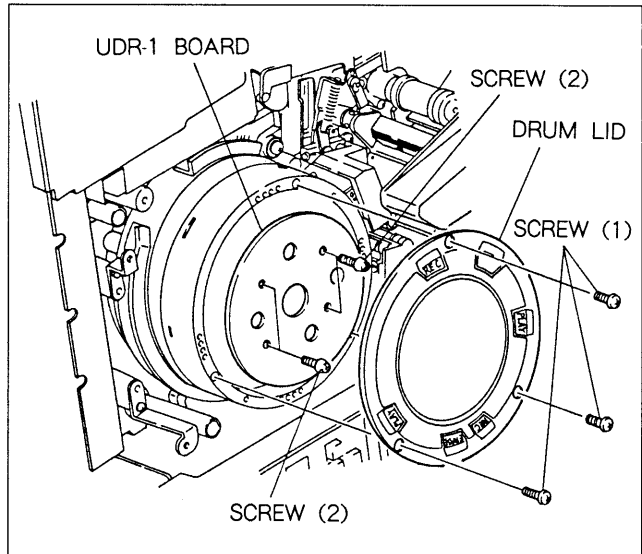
Video REC Head Playback Tool Installation (1)
